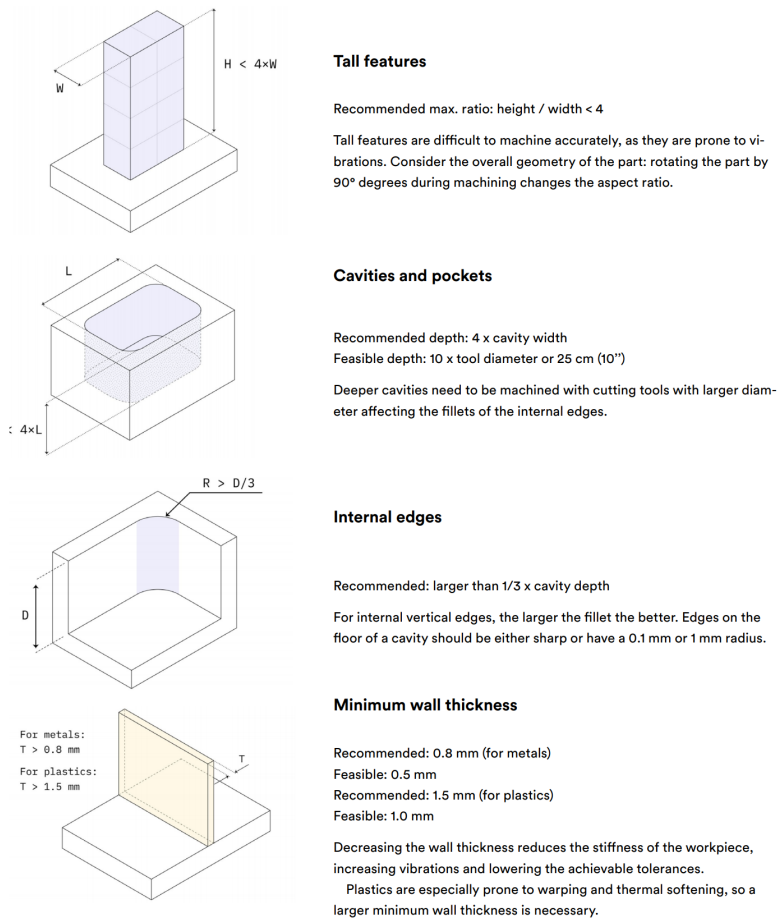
Design Rules for CNC (“CNC Machining: The Complete Engineering Guide”, n.d.)
